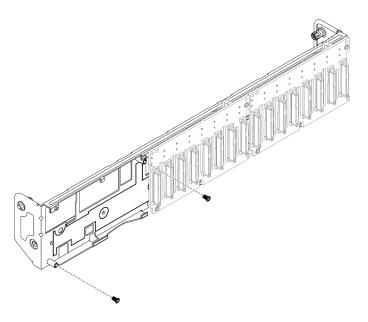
Spare screws on backplane carrier (E3.S bay chassis)
